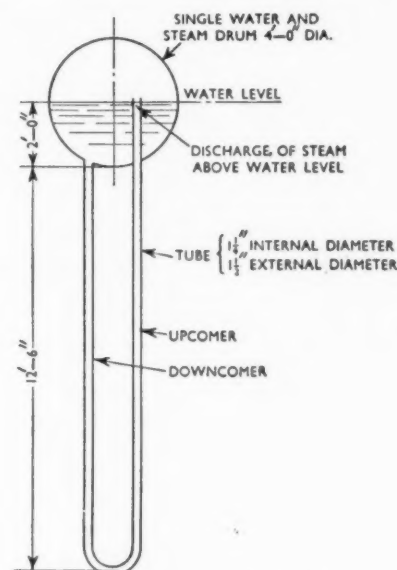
PROPOSED STANDARD U-TUBE BOILER
